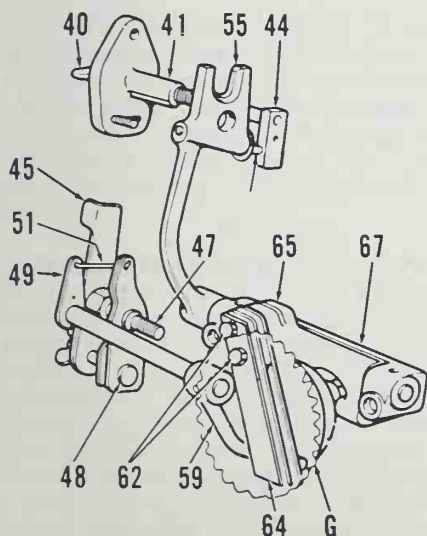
Diagram of governor mechanism. Refer to text and Fig. L5-11 for parts identification.
